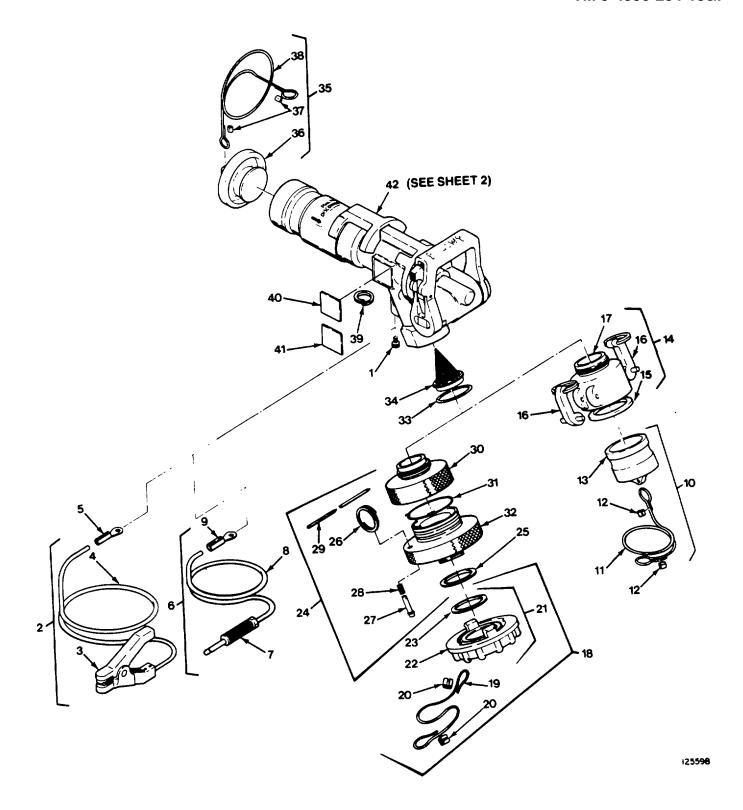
CCR Nozzle Assembly (Sheet 1 of 2)
